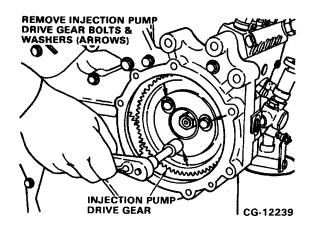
Remove Injection Pump Drive Gear Bolts
